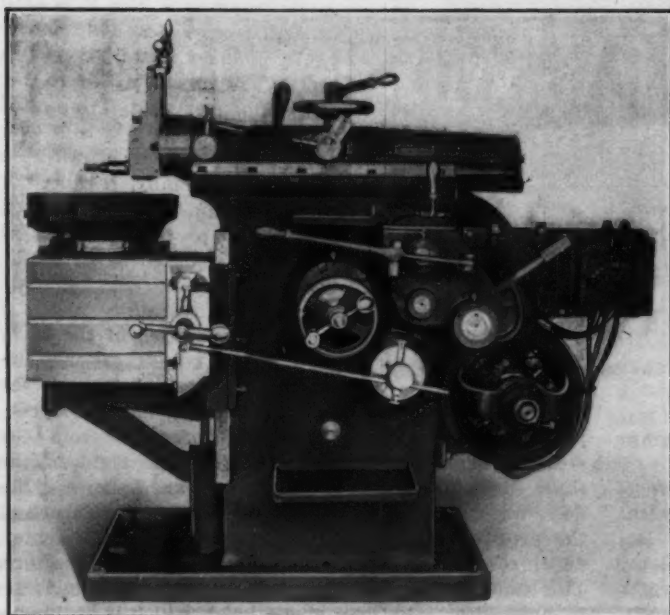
The 20-In. Flather Shaper Equipped with Constant Speed Motor Drive.
